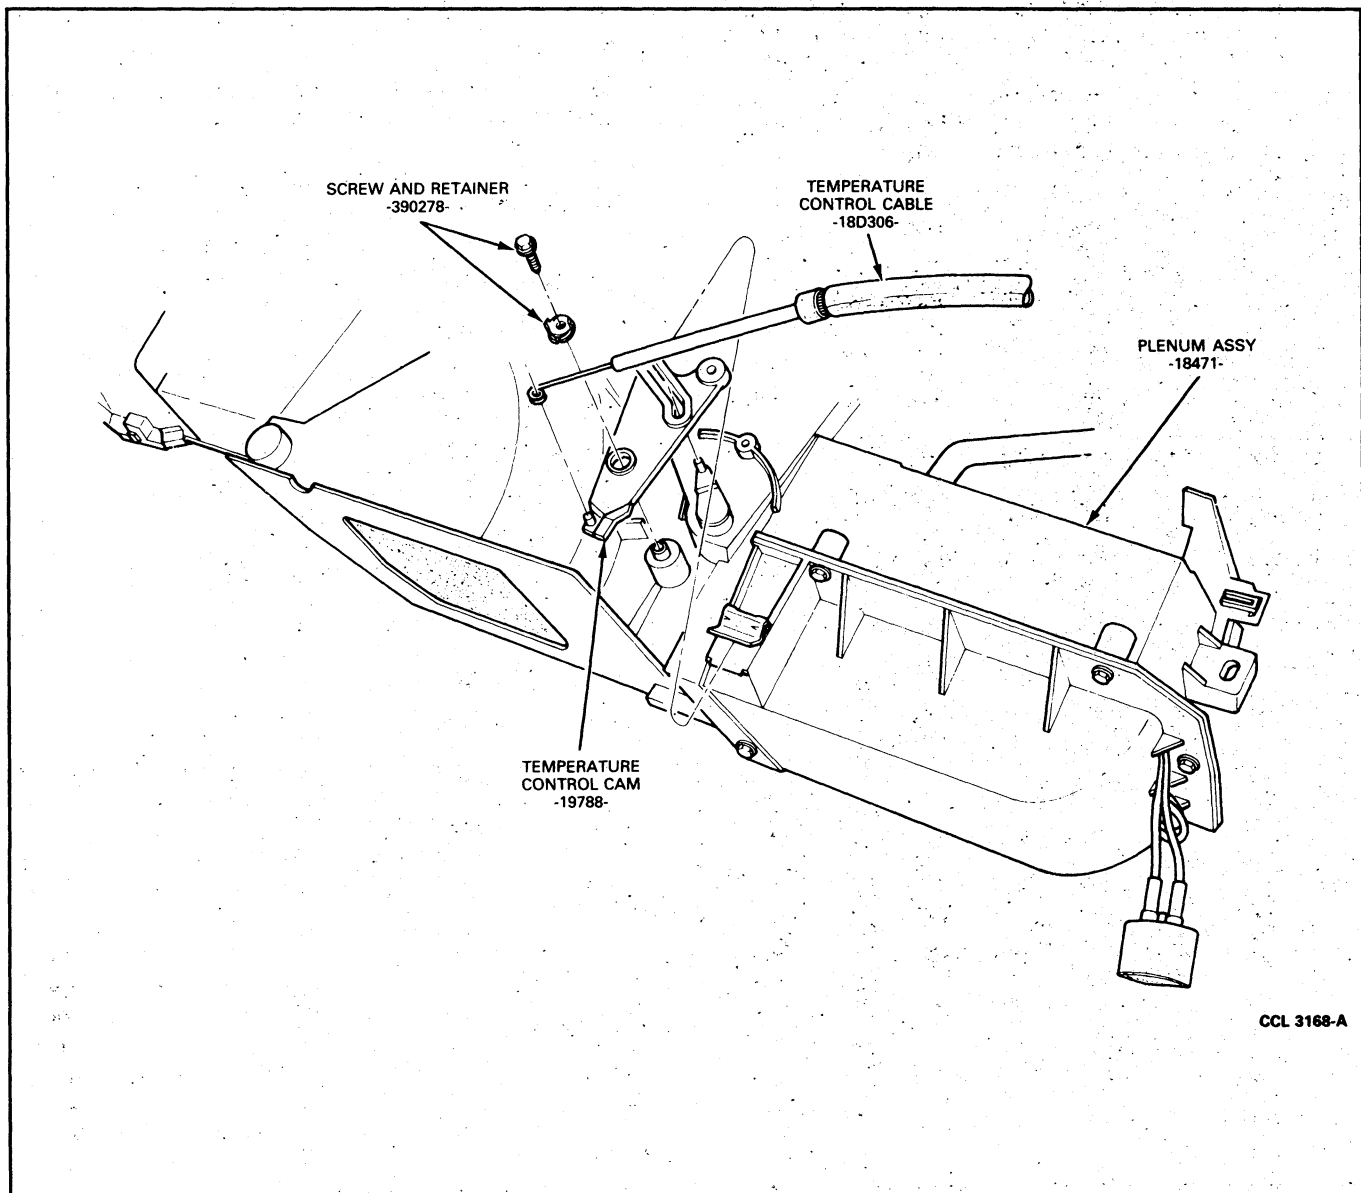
Temperature (Blend Air Door) Cable Adjustment
